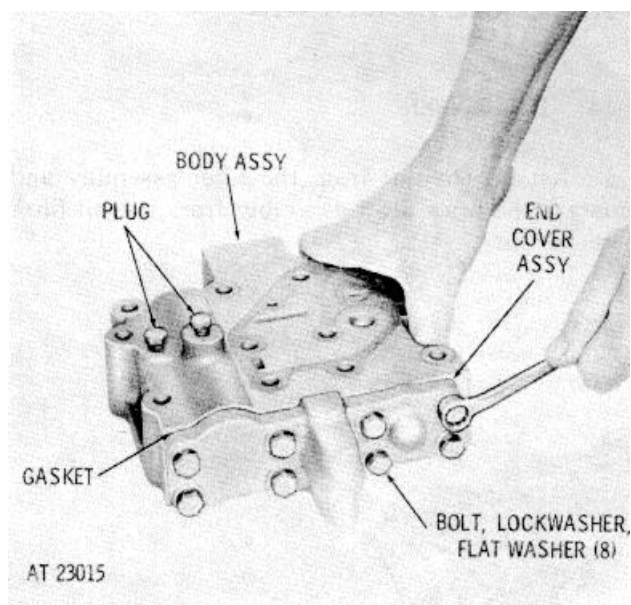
Removing for installing) main-pressure regulator end cover bolt.
